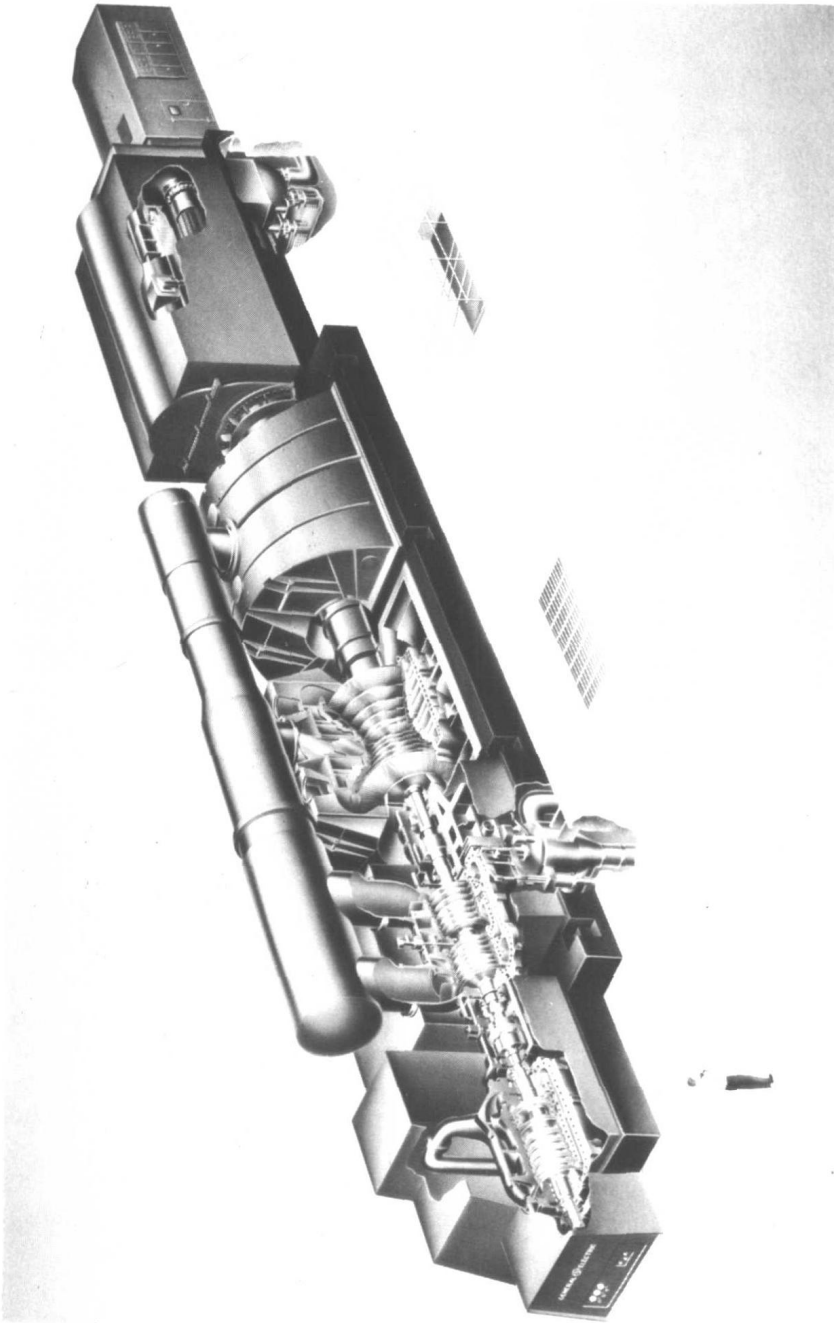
A large steam turbine (Courtesy General Electric Co.).
